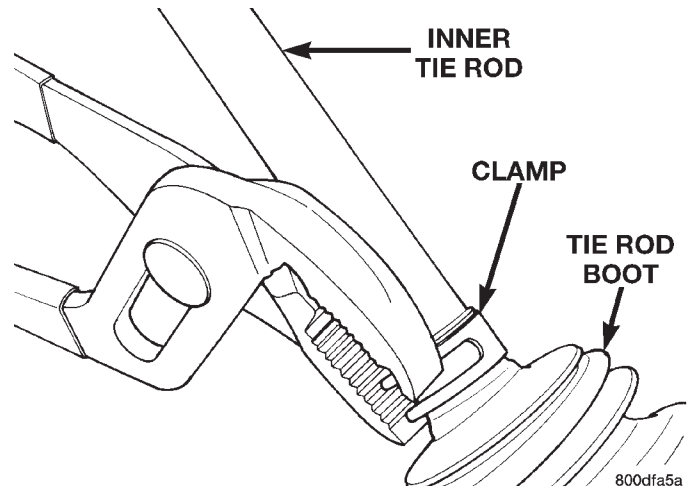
Tie Rod Boot To Tie Rod Clamp
